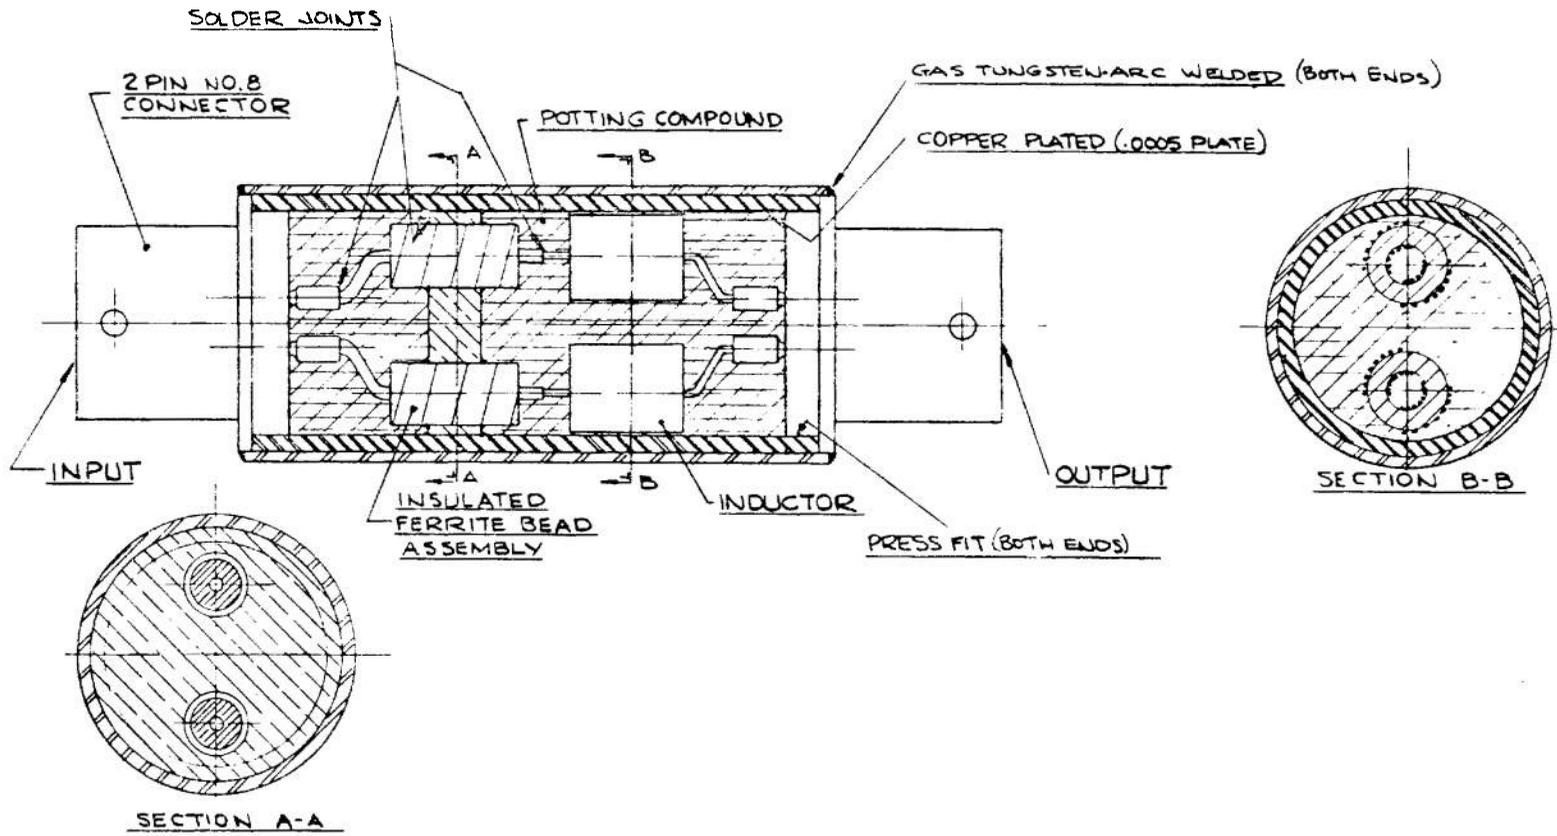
Assembly Drawing of 2-pin Hybrid Filter (NASA)
